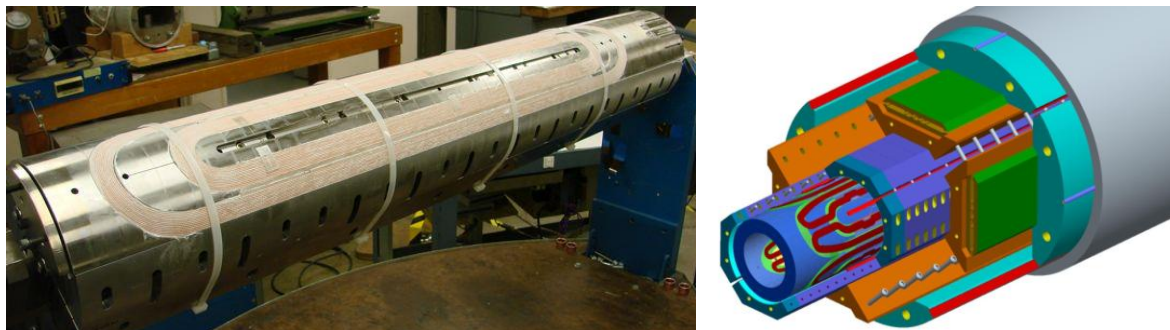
First practice coil after curing (left) and exploded view of the HQ design (right).
